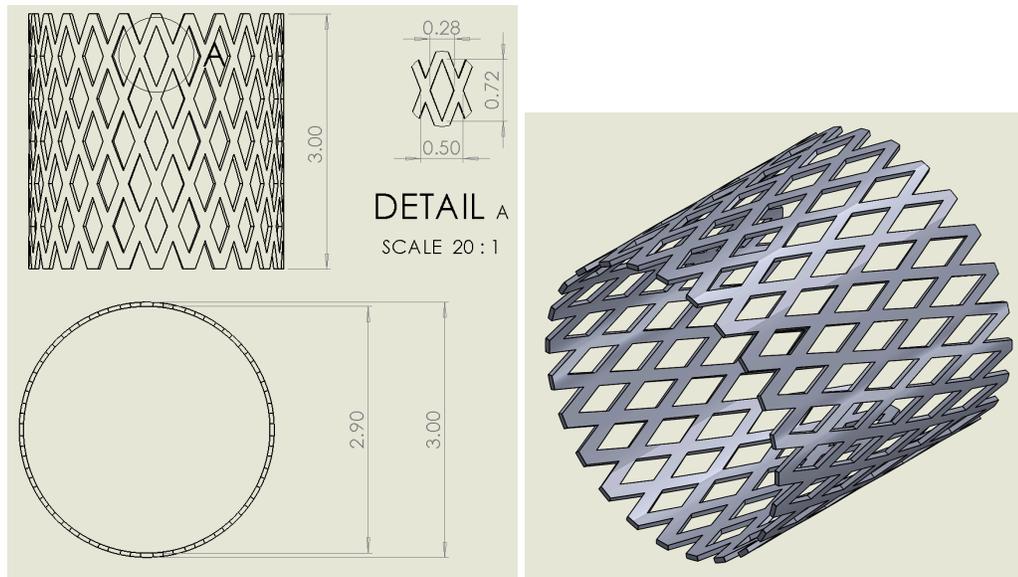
SolidWorks drawing showing the stent model with dimensions.
